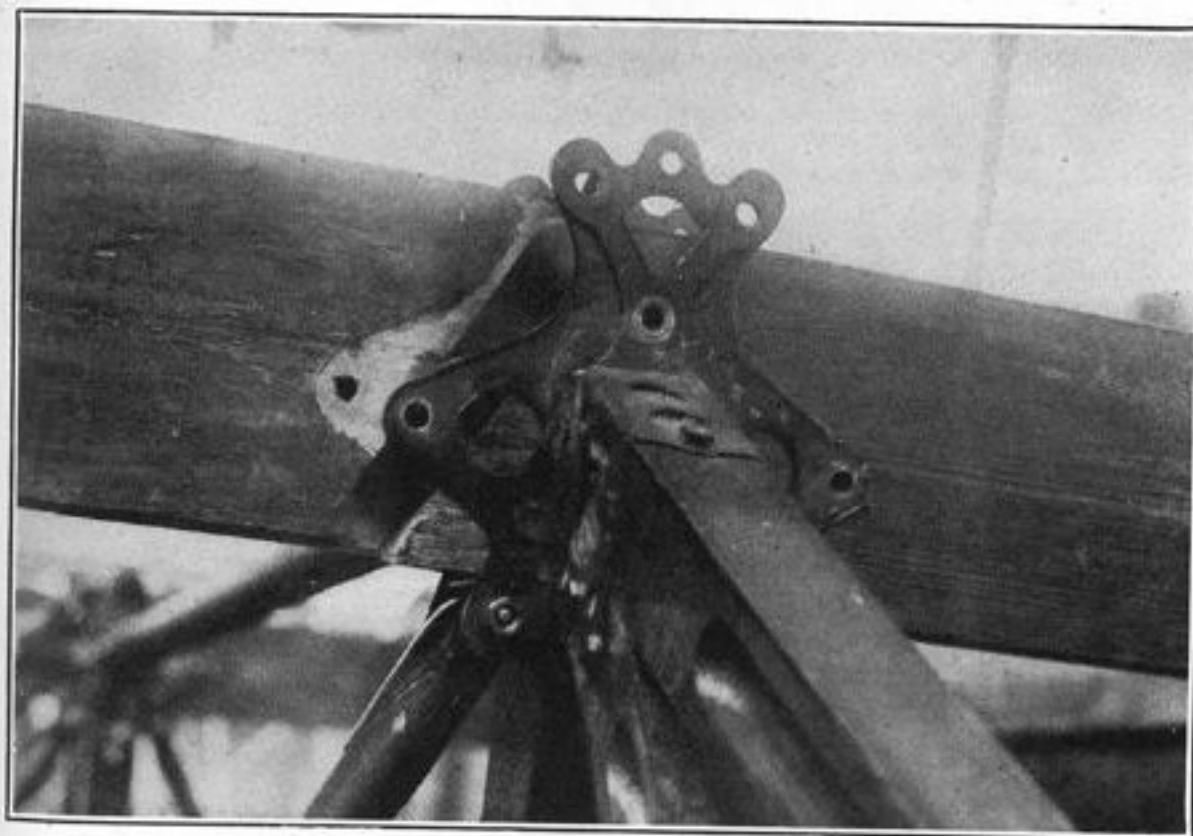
SPLICE IN SIDEWALK BEAM WITH STARBOARD PIECE PARTLY REMOVED.
